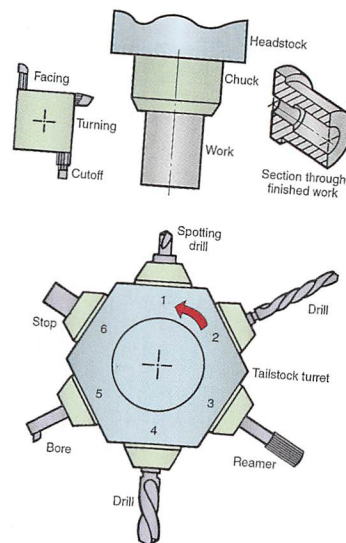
The turret in relation to other parts of a lathe. The turret rotates to bring each cutting tool into position. Stops control the depth of tool cuts.
